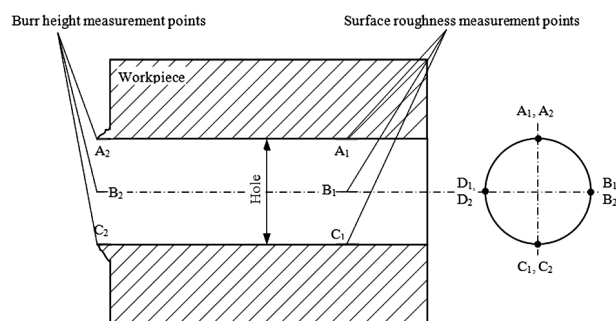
Burr height and surface-roughness measurement points of the produced hole
